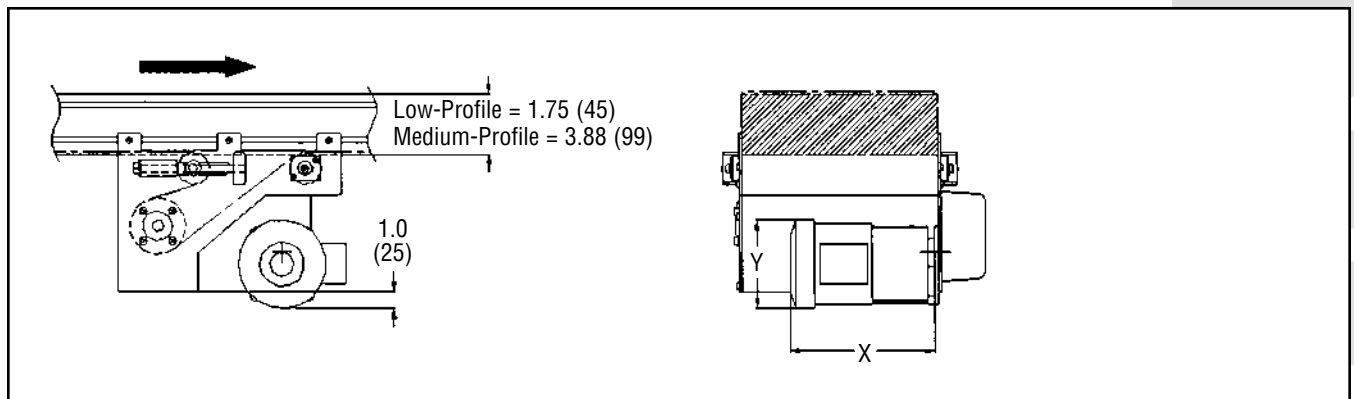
Center Drive-Parallel Gear Motor (left hand shown)
